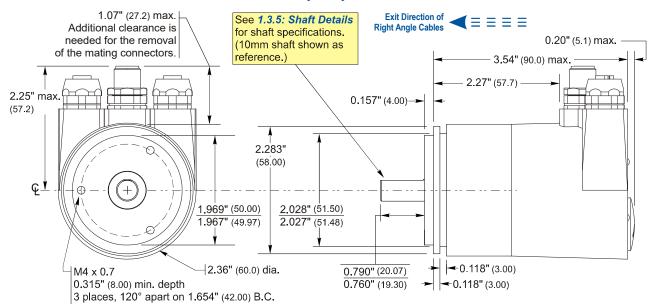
Servo Mount, Side Connector Outline Drawing
